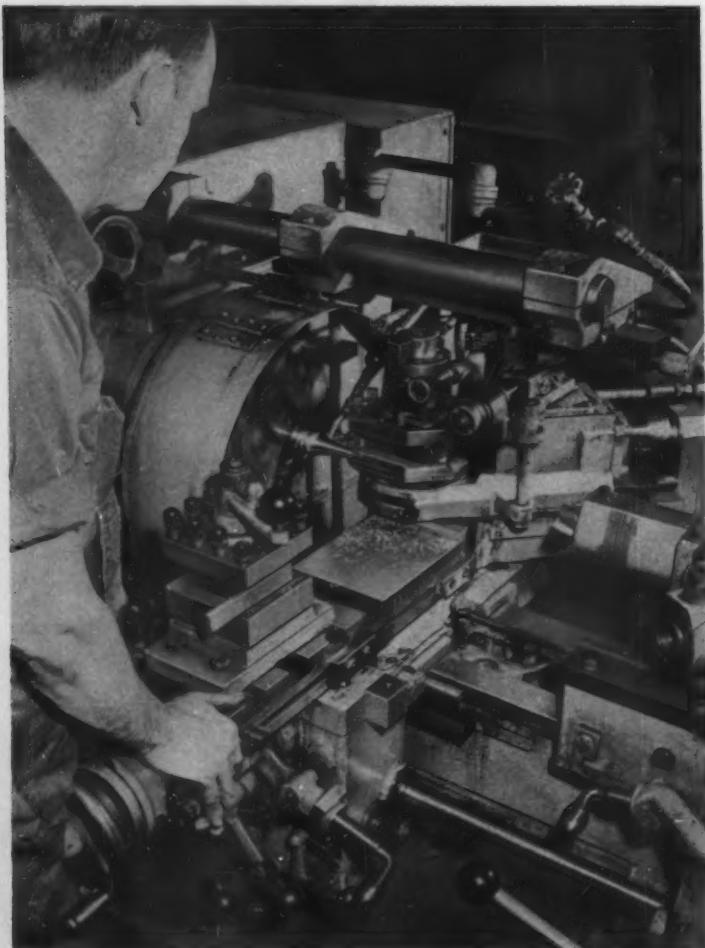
Hydraulic cross-slide tracer on a W&S No. 5 turret lathe takes a finish contour cut on a hard-faced glass-mold plunger.
